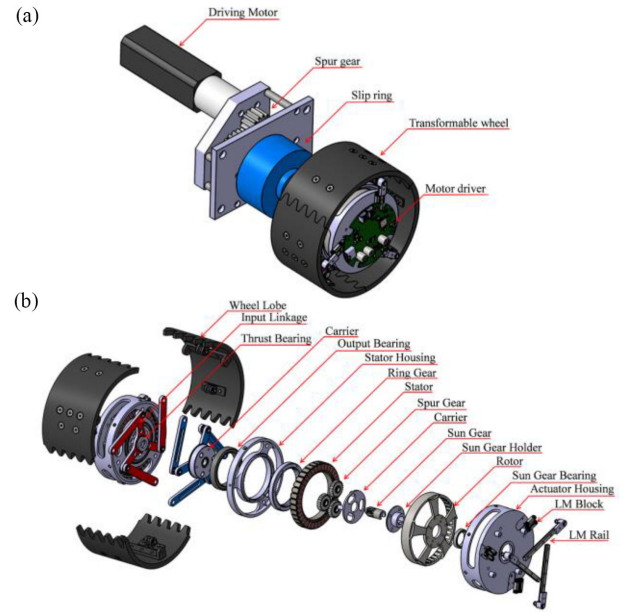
Virtual model of modular wheel: (a) isometric view, (b) exploded view.
